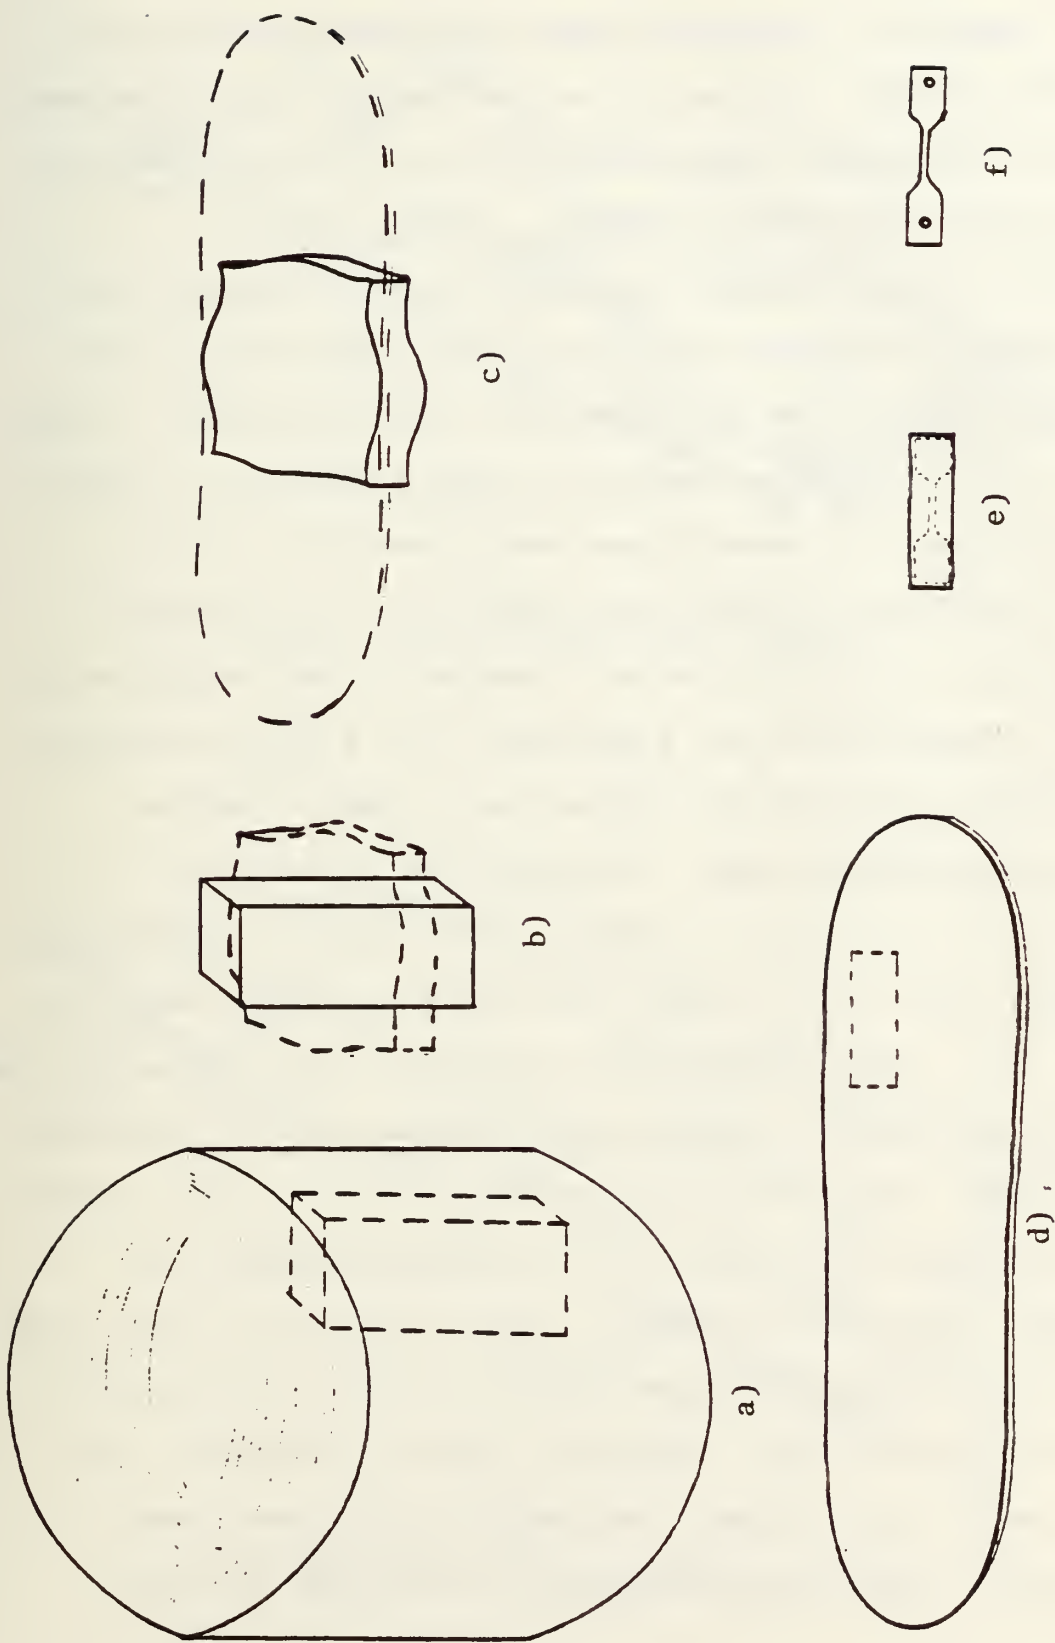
Schematic illustration of processing sequence from a) billet cut out of ingot, b) upset forged, c) warm rolled, d) blanks cut out, and e) machined to sample dimension.
